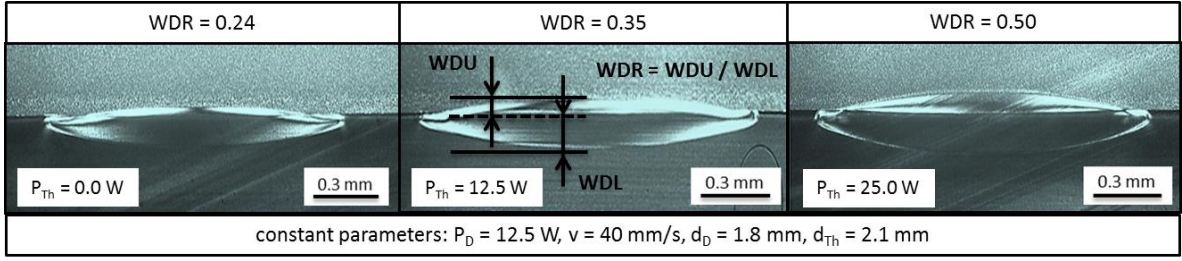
Thin-cuts of contour-welded PA6 samples with derived weld depth ratio WDR (WDU = weld depth in upper part, WDL = weld depth in lower part,  $P_D$  = laser power diode laser,  $d_D$  = beam diameter diode laser,  $P_{Th}$  = laser power thulium fiber-laser,  $d_{Th}$  = beam diameter thulium fiber-laser,  $v$  = feed rate)
